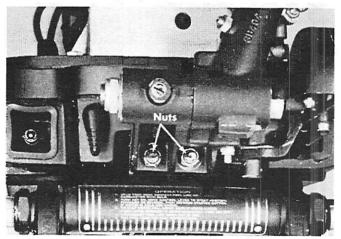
Handle Assembly Installed Jan. 1967 Section VIIIC – Miscellaneous
